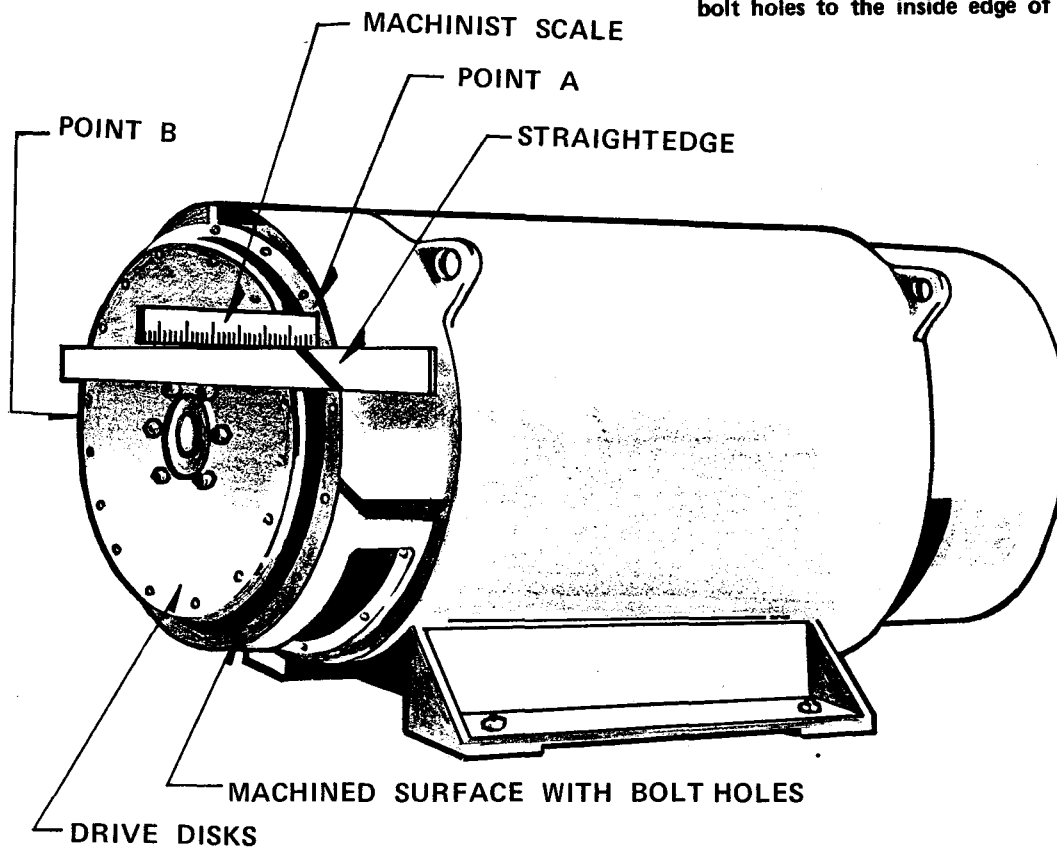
MEASURING DISTANCE FROM GENERATOR ADAPTER TO DRIVE DISKS, DIMENSION "Y"
